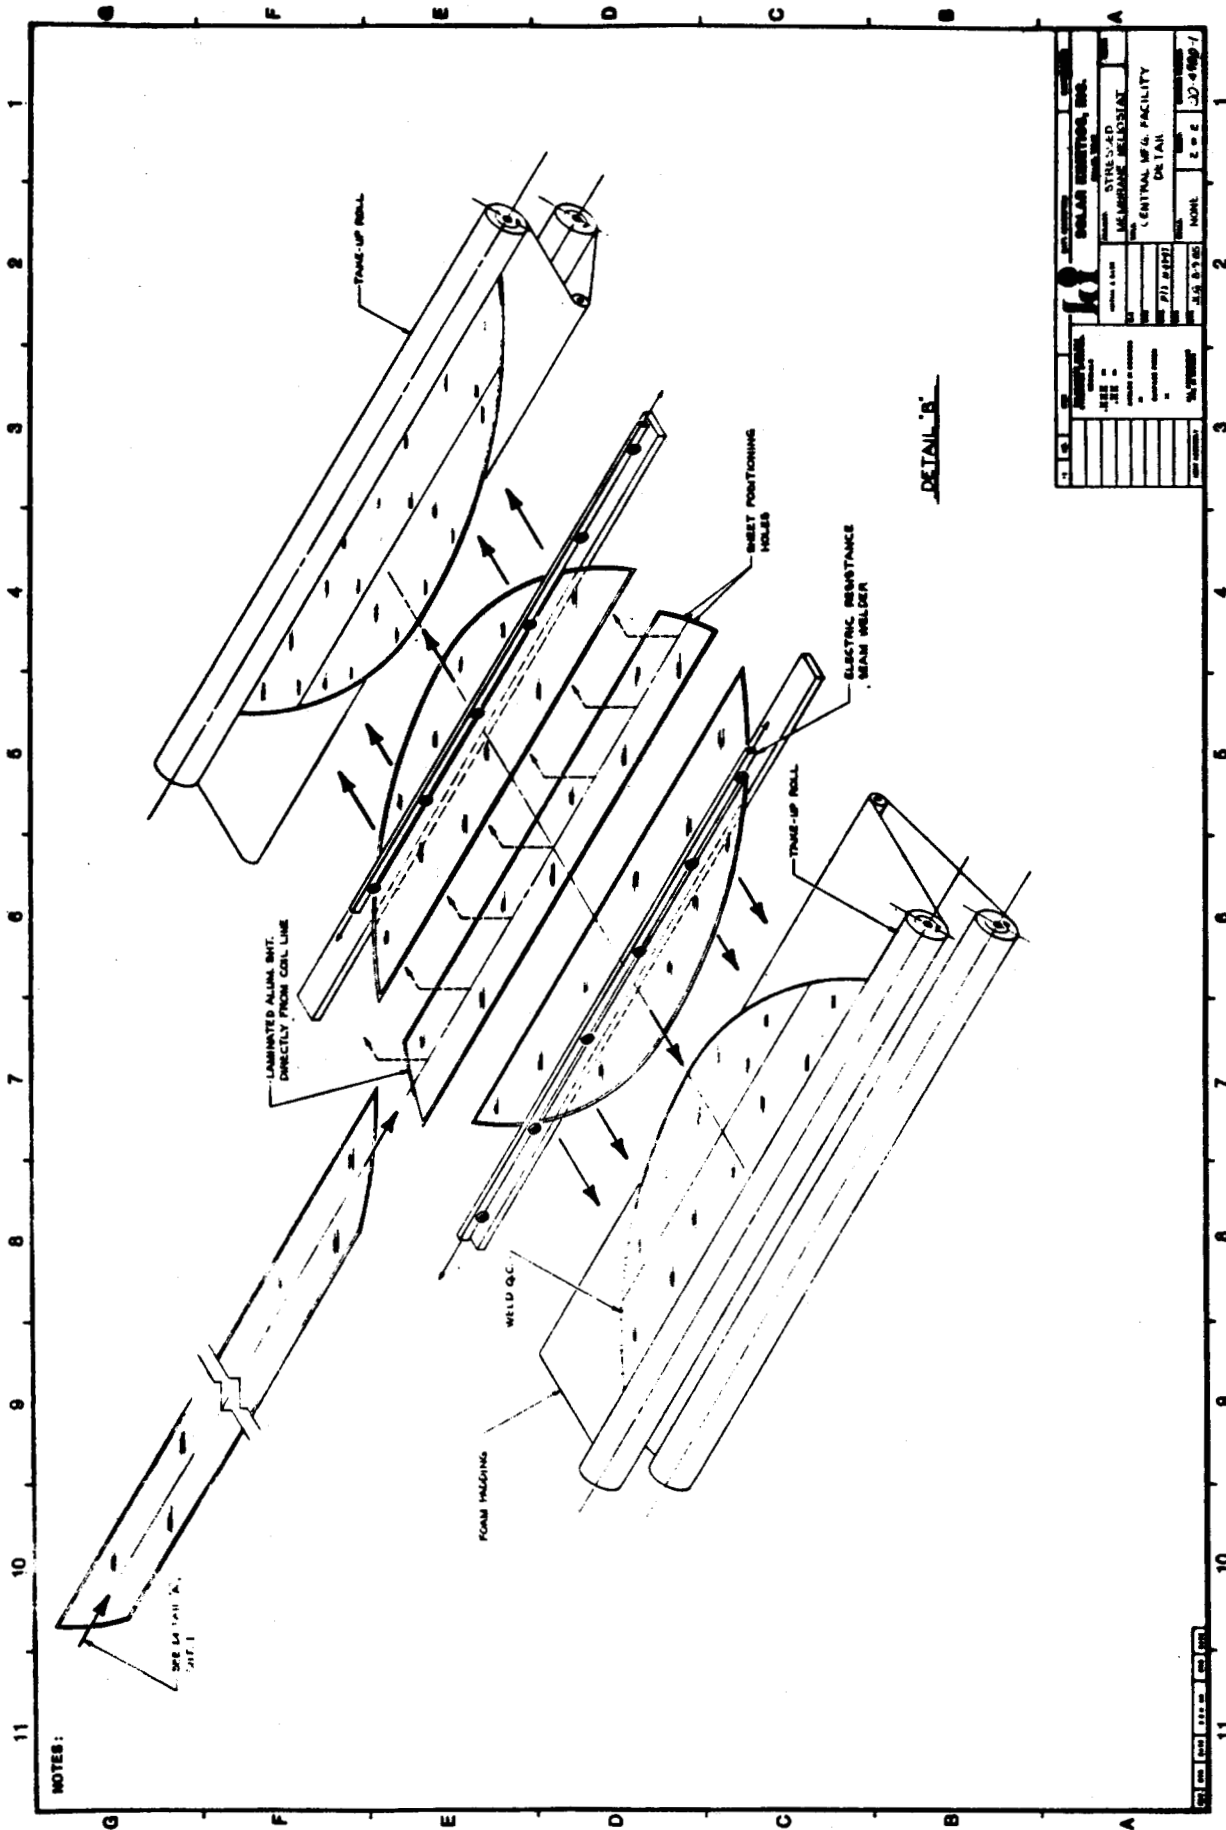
MEMBRANE FABRICATION - WELDING STATION
